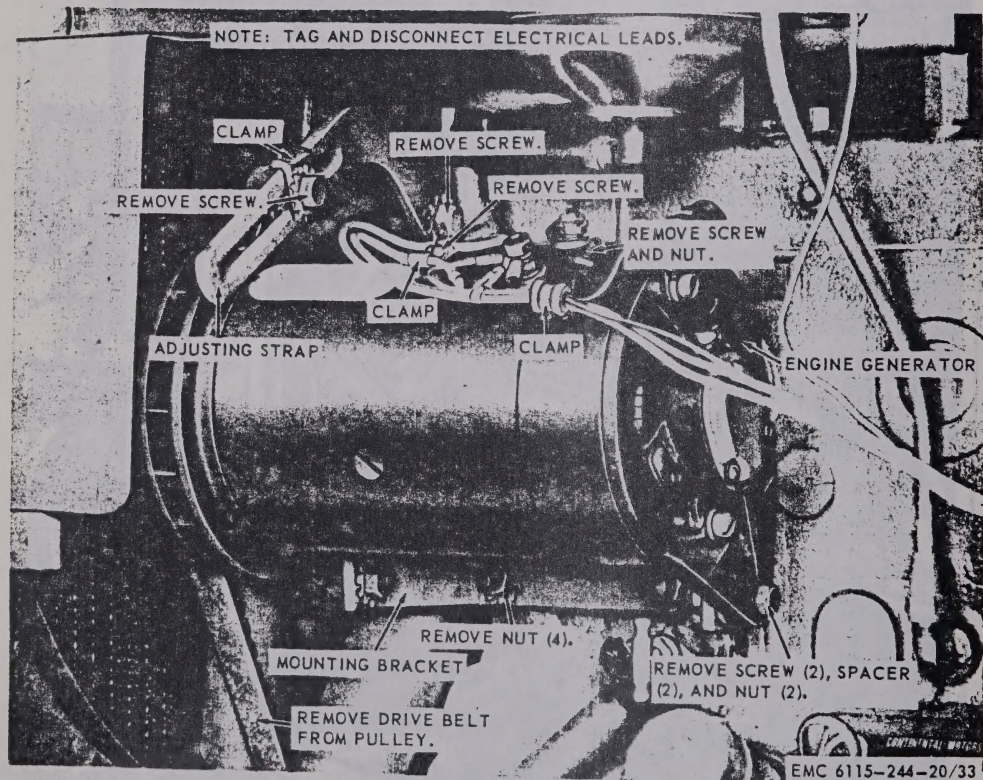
Engine generator, mounting bracket, and adjusting strap, removal and installation.
